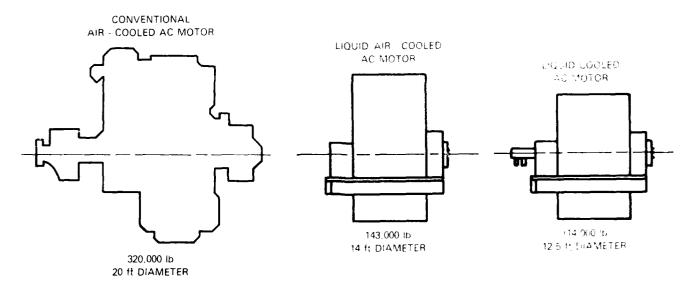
Impact of liquid cooling on a 40,000 hp, 180 rpm motor.
